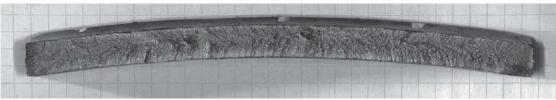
Example fracture surface, indicating brittle fracture originating from a weld porosity.
